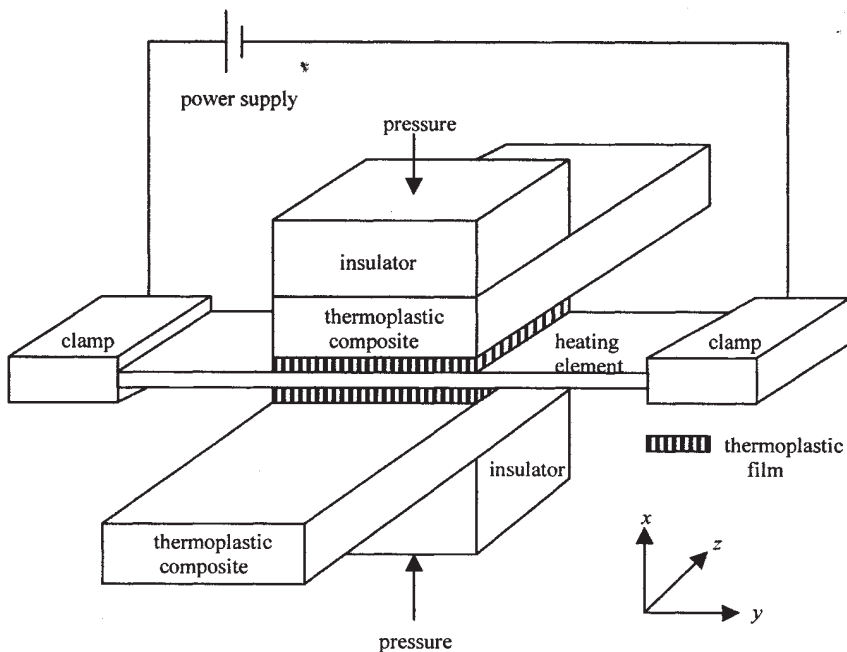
Resistance welding setup for joining thermoplastic composites [2,5].
